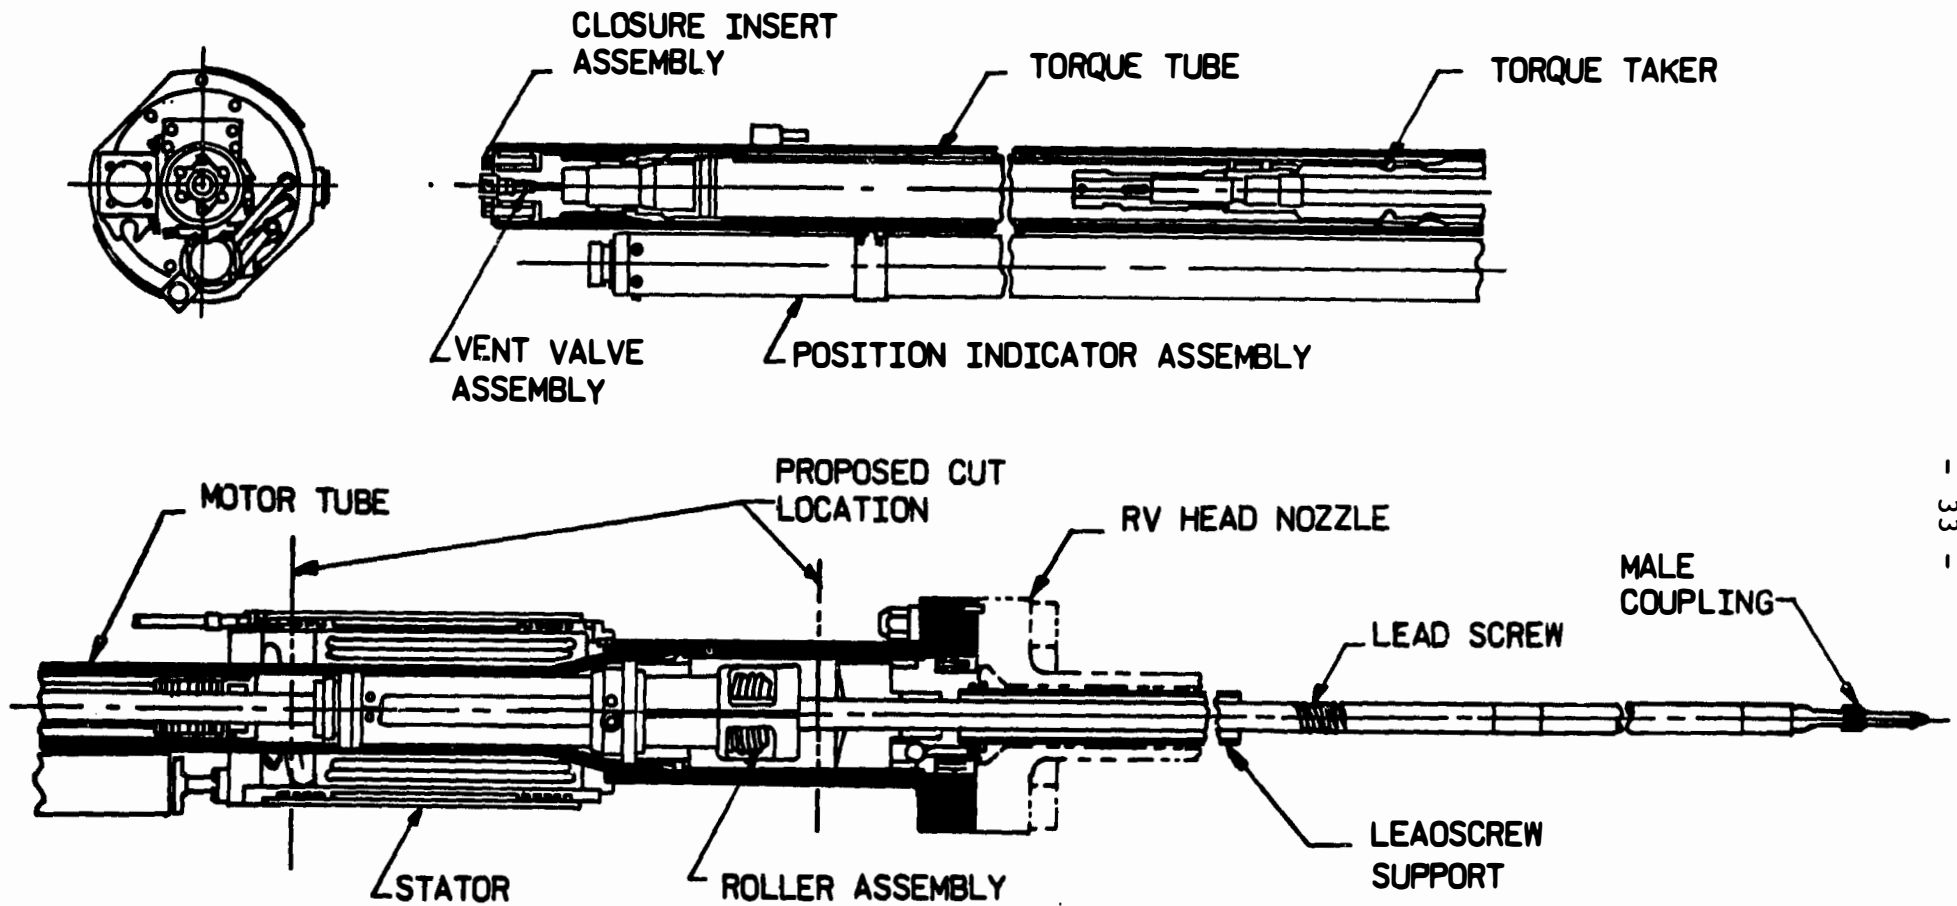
CONTROL ROD DRIVE MECHANISM
